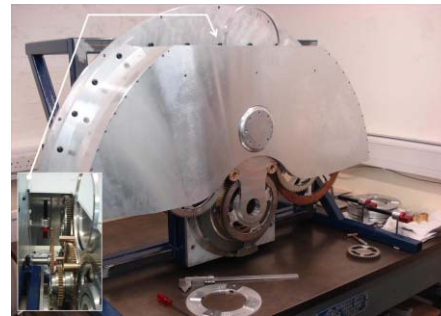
The diffuser system being assembled on the test stand in the Oxford Mechanical Workshop. The inset shows the packed volume hosting gears and motors.
